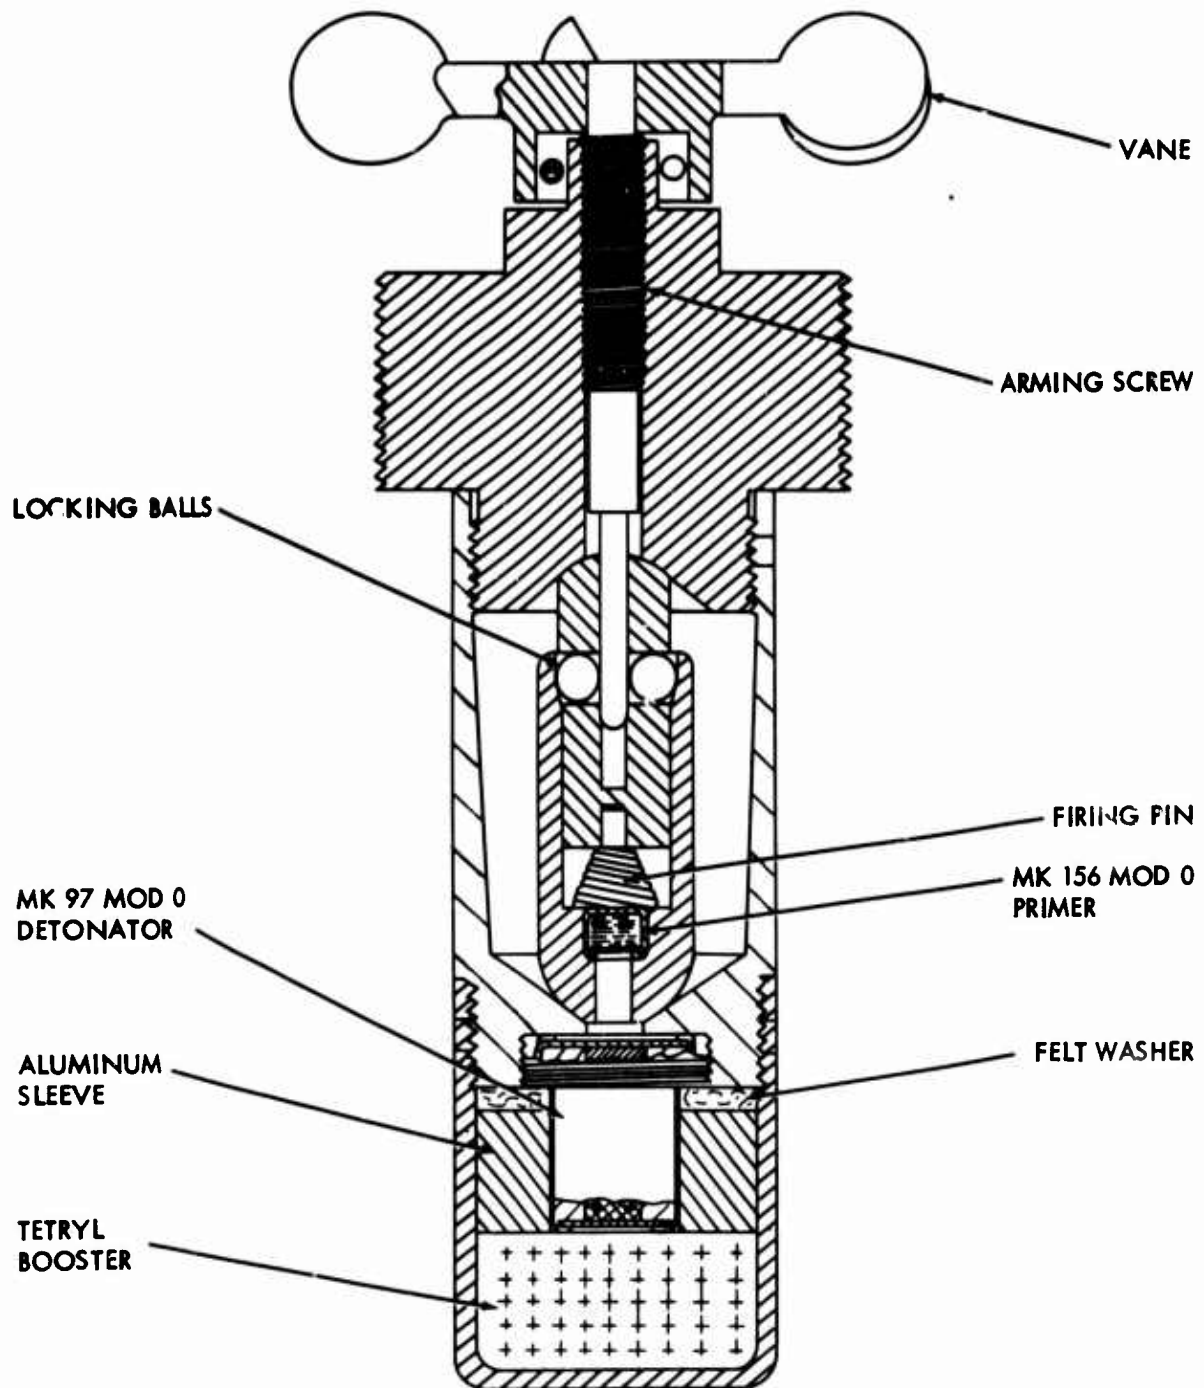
EXPLOSIVELY MODIFIED AN-M173A1 FUZE
